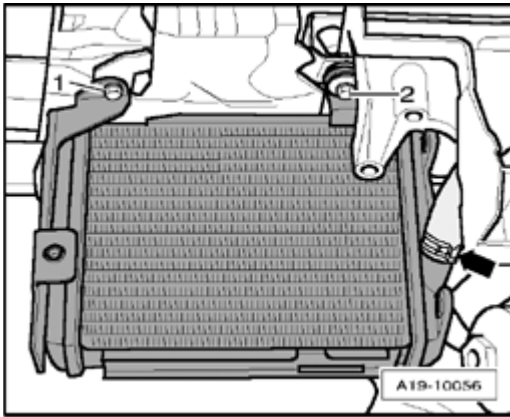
Auxiliary Radiator Coolant Hose & Bolts
